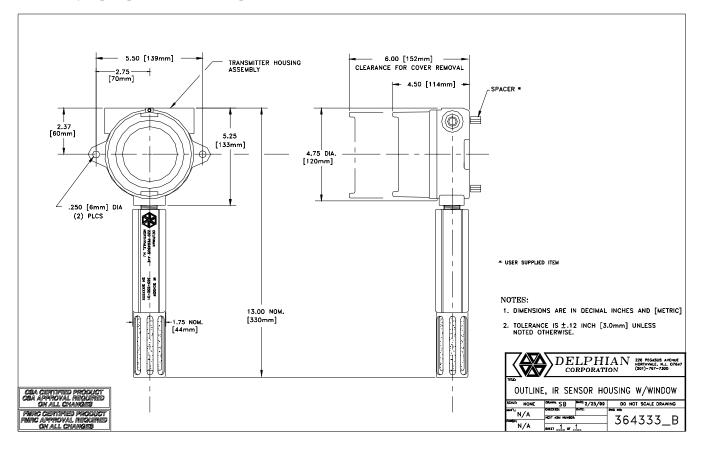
Outline of FPIR Sensor Housing with Window (Drawing # 364333)
